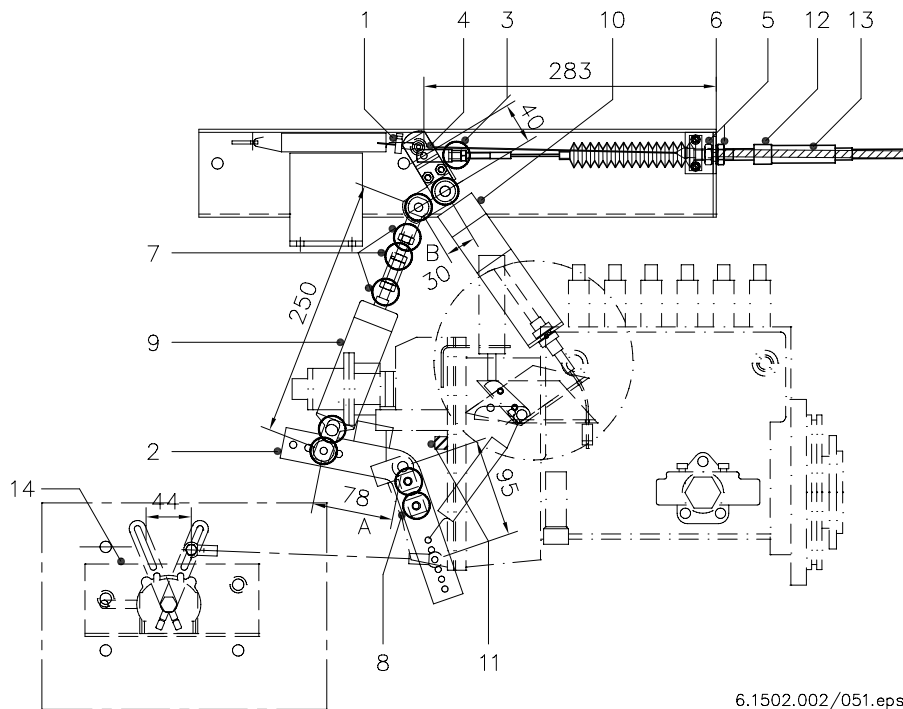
Fitting and adjusting the throttle control at the rear for MAN Euro 1 type engines
